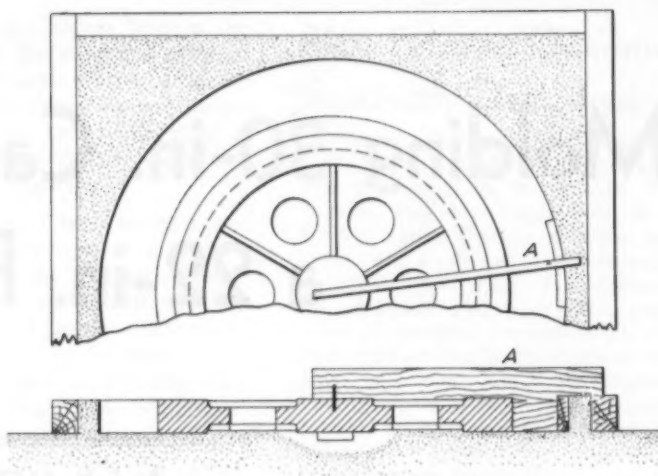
Plan and section views of pattern and mold ready for plaster extension to be poured.
